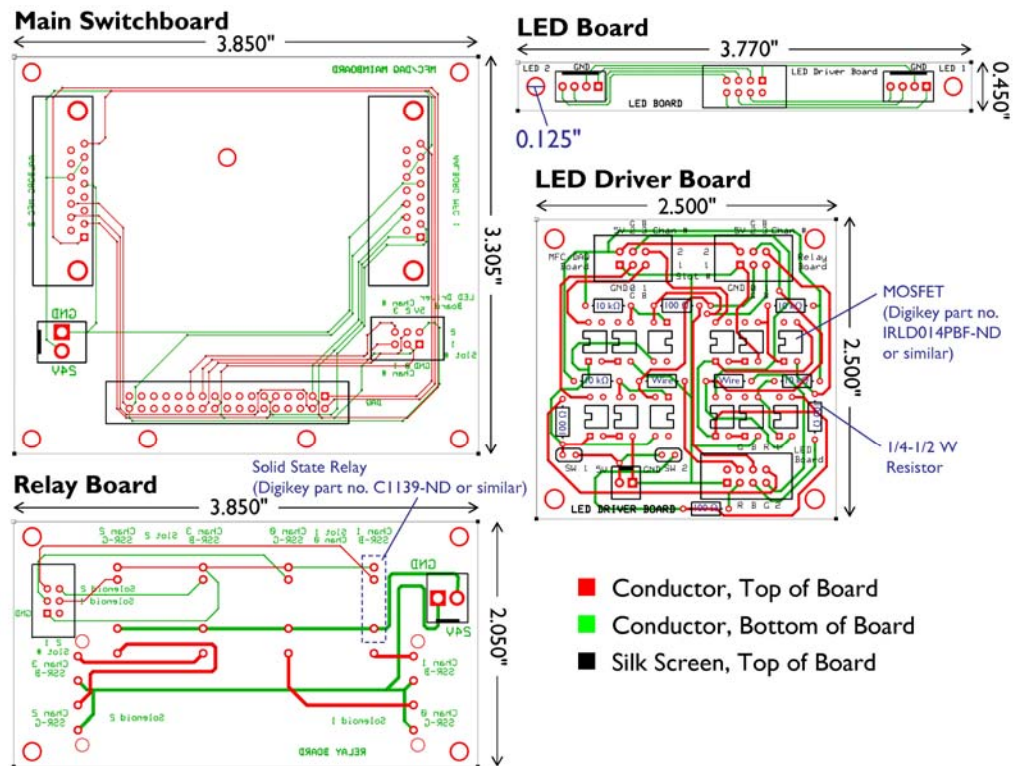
Circuit board layouts and dimensions for MANGO.
